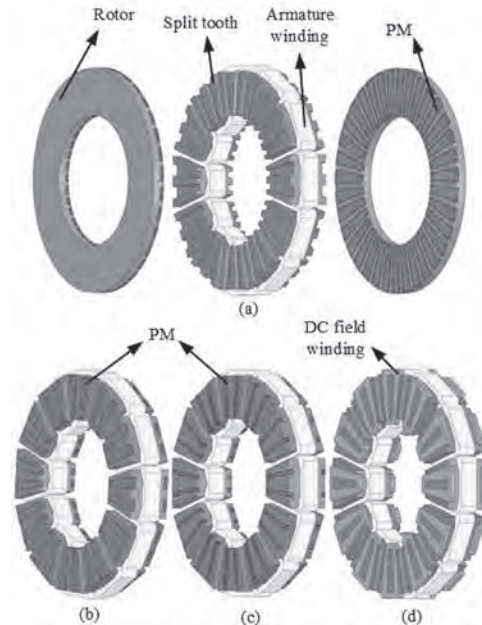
3-D view of the proposed machines. (a) Machine A. (b) The stator of machine B. (c) The stator of machine C. (d) The stator of machine D.
